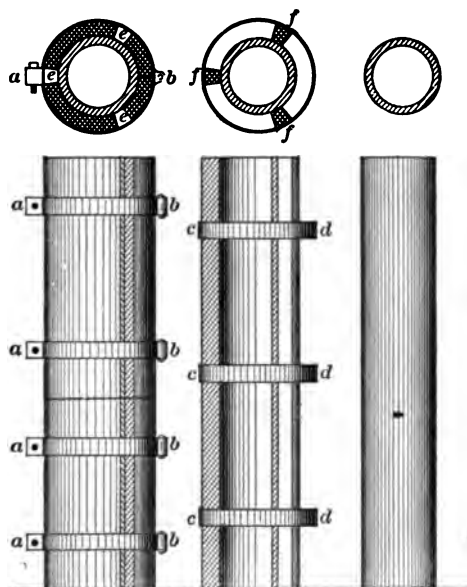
ARRANGEMENT OF AUGUR MACHINE FOR MAKING RETORTS.
